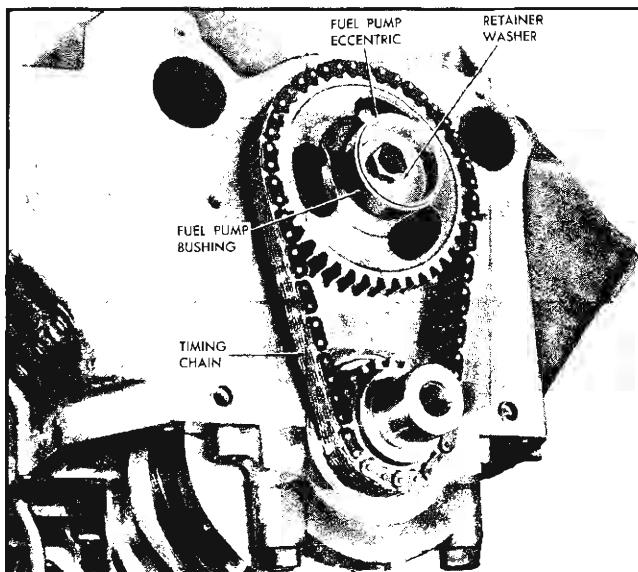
Front of Engine with Timing Cover Removed (V-8)
